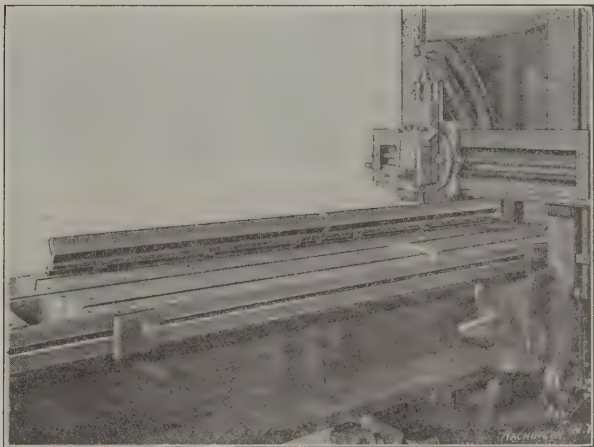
Back Stops Used for Holding the Brackets Bottom up.
